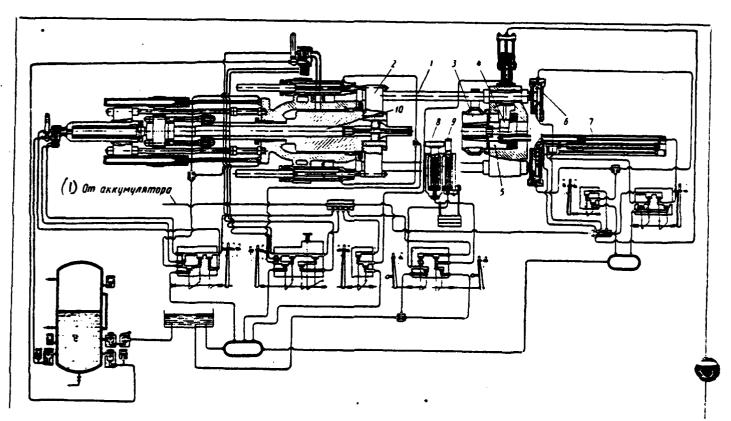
The schematic of bar-tube press (extrusion according to the direct method): 1 - mounting of press; 2 - drive of stamp (working and pull-backs); 3 - container; 4 - gate/shutter with the cylinder for its lift; 5 - outer die; 6 - shear press; 7 - branch/drain table; 8 - mechanism for supplying the ingot; 9 - mechanism for supplying the dummy block; 10 - mechanism for the piercing of ingot.
